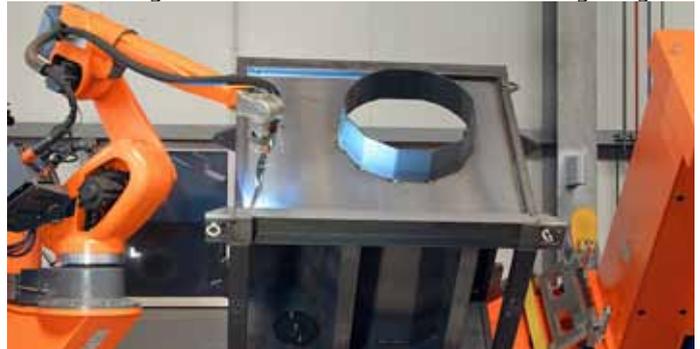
The 1.5-ton workpiece positioner always brings the machine housing into the perfect position for welding.
